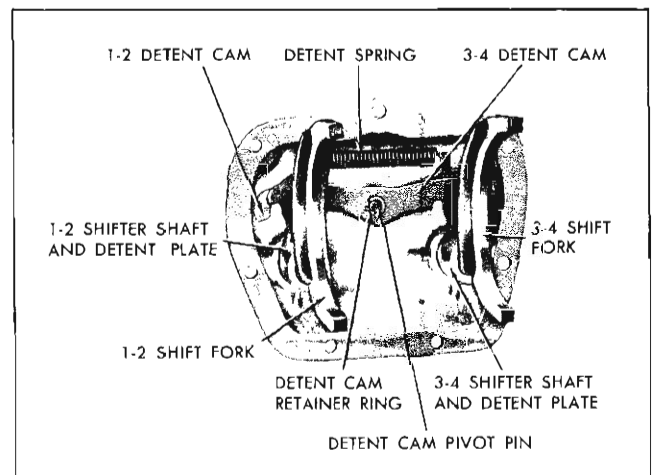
M—Transmission Side Cover, Shift Fork and Detent Assembly
